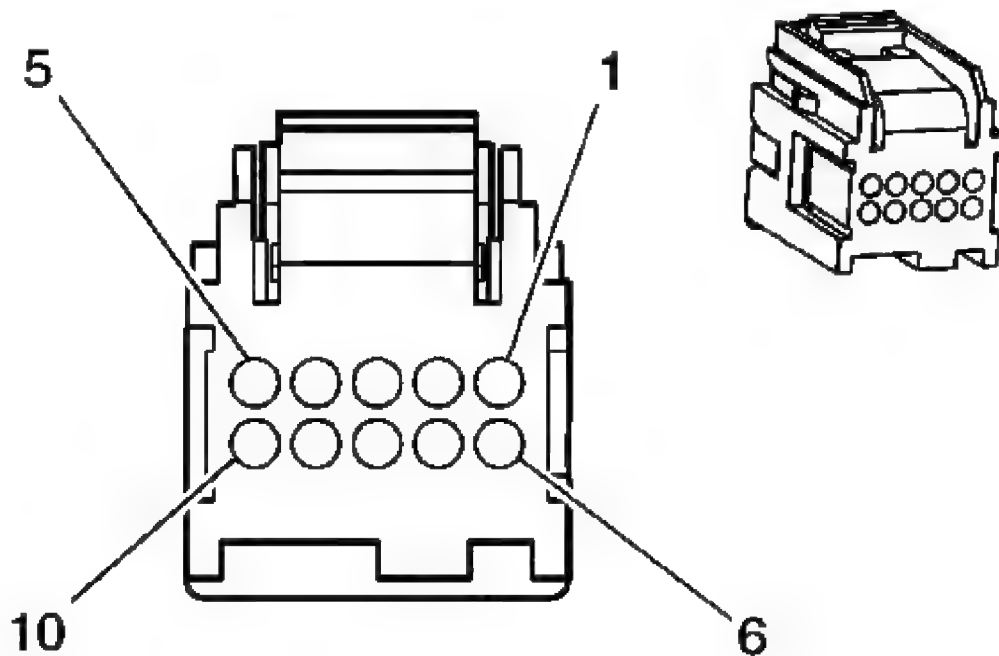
Front Climate Control Seat Module C2 (KB6) Connector End View
